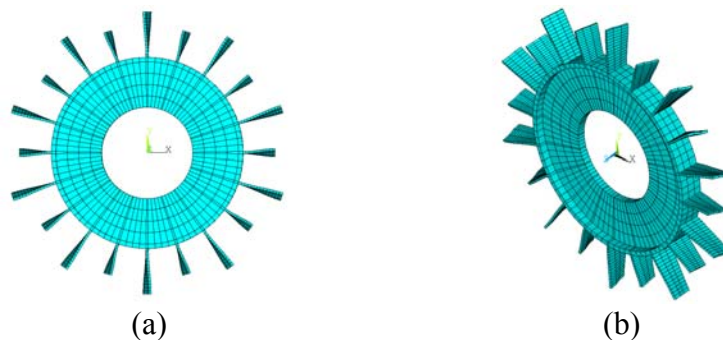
Impeller FE model: a) frontal view; b) isometric view
